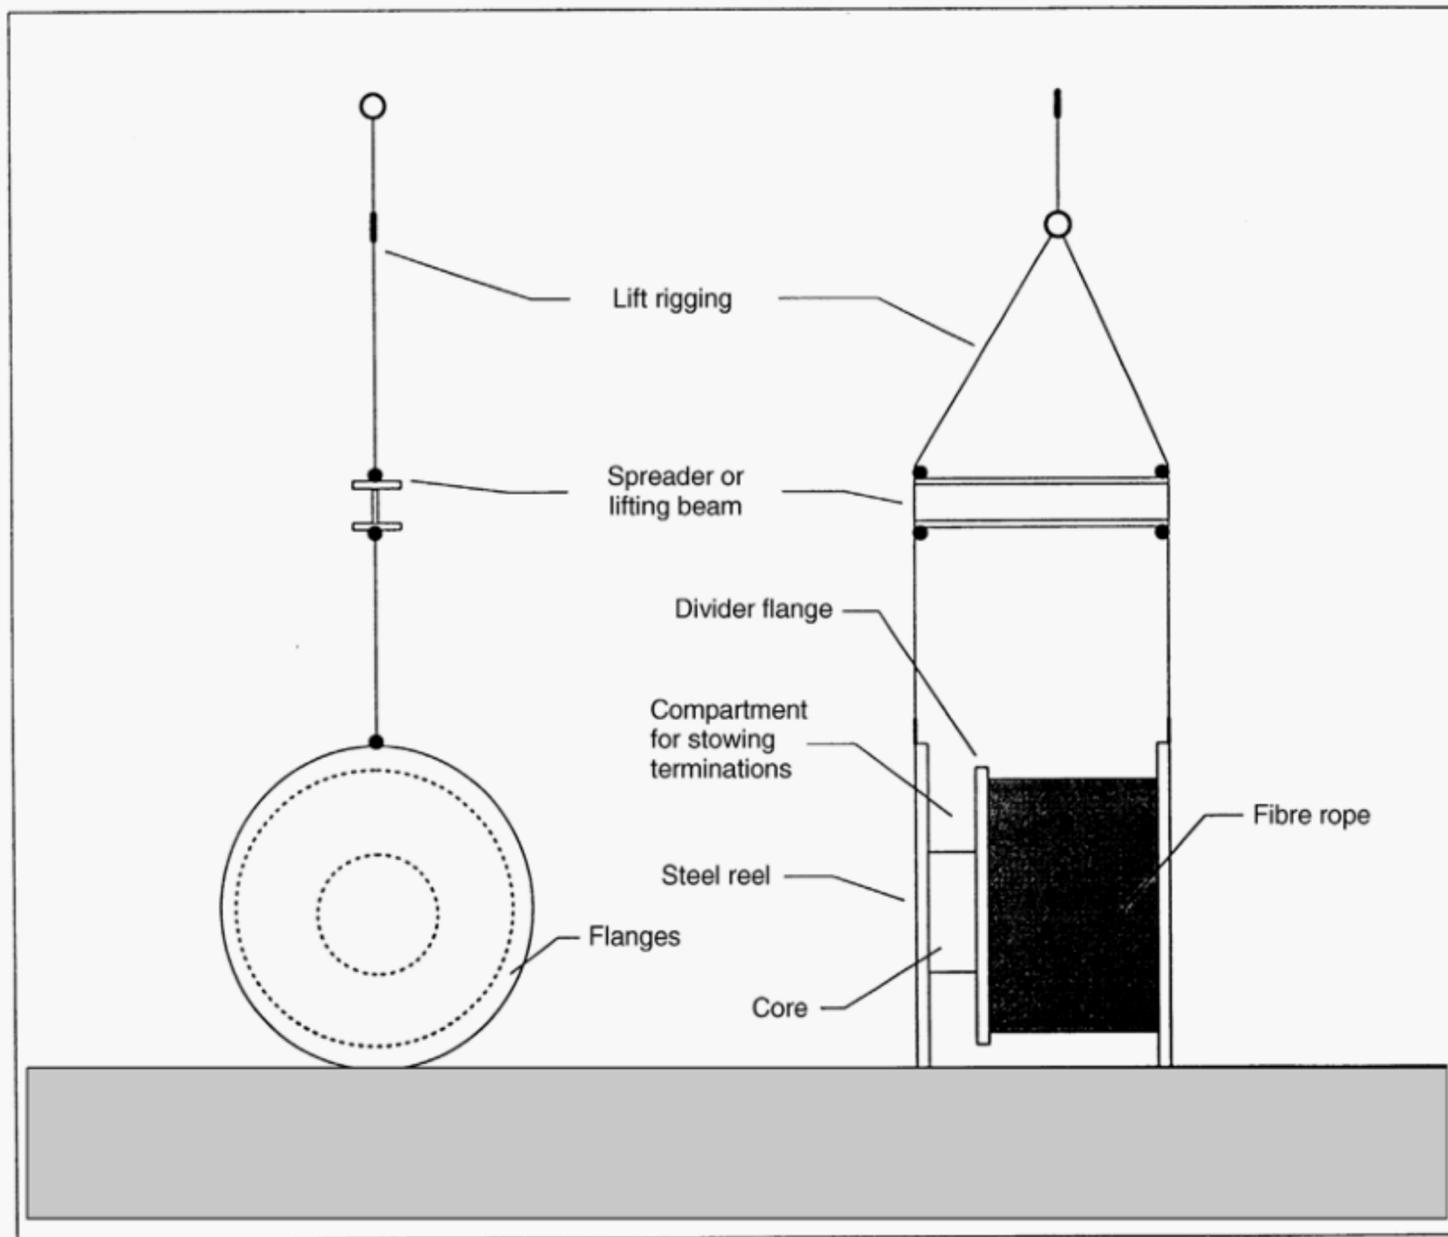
Typical Storage Reel and Lifting Arrangement
